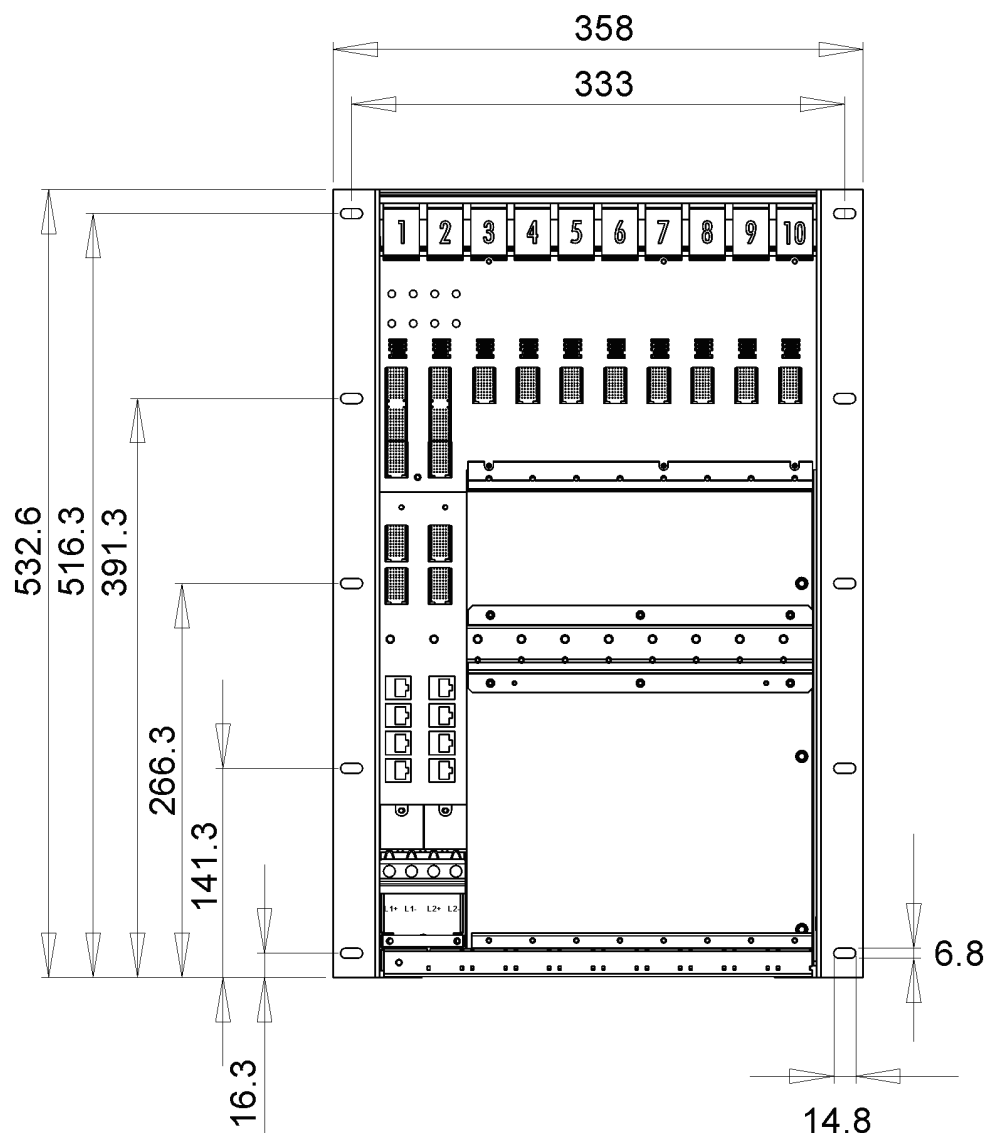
Dimension Drawing of X-BASE PLATE 10 31
